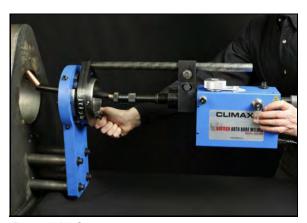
SUPPORTING THE BORE WELDER FOR SAG ADJUSTMENT (EXTENSIONS NOT SHOWN)
